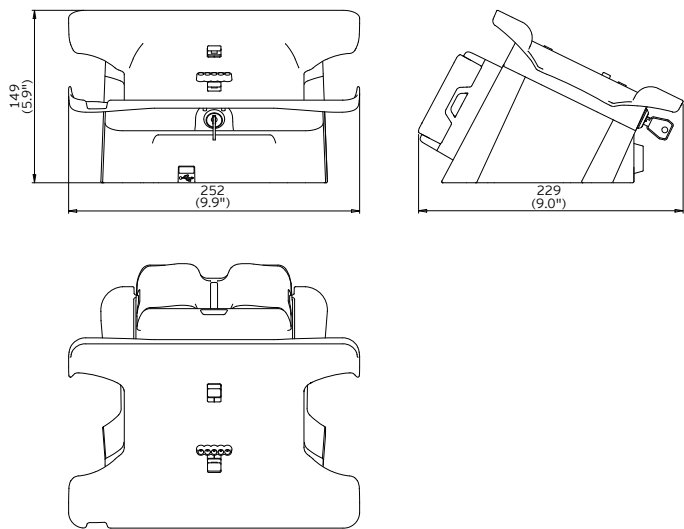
MobilePad charging- and docking station (dimensions in millimetres)
